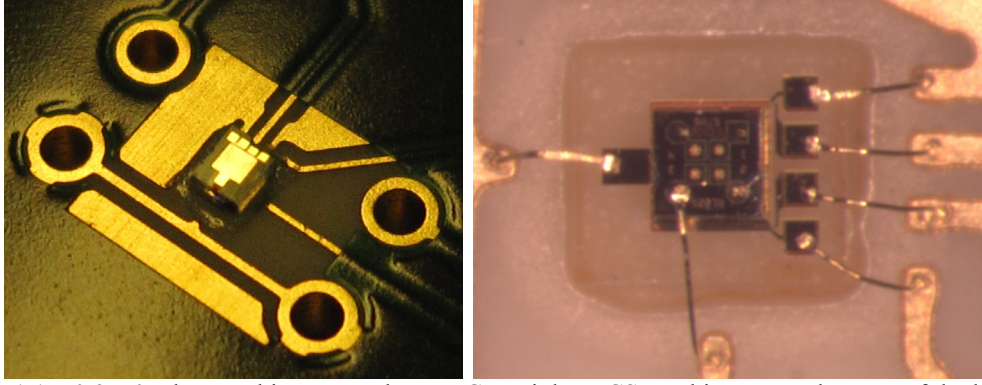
Left: 1.1 x 0.9 x 0.5 heater chip mounted on a PCB. Right: VCSEL chip mounted on top of the heater chip.
